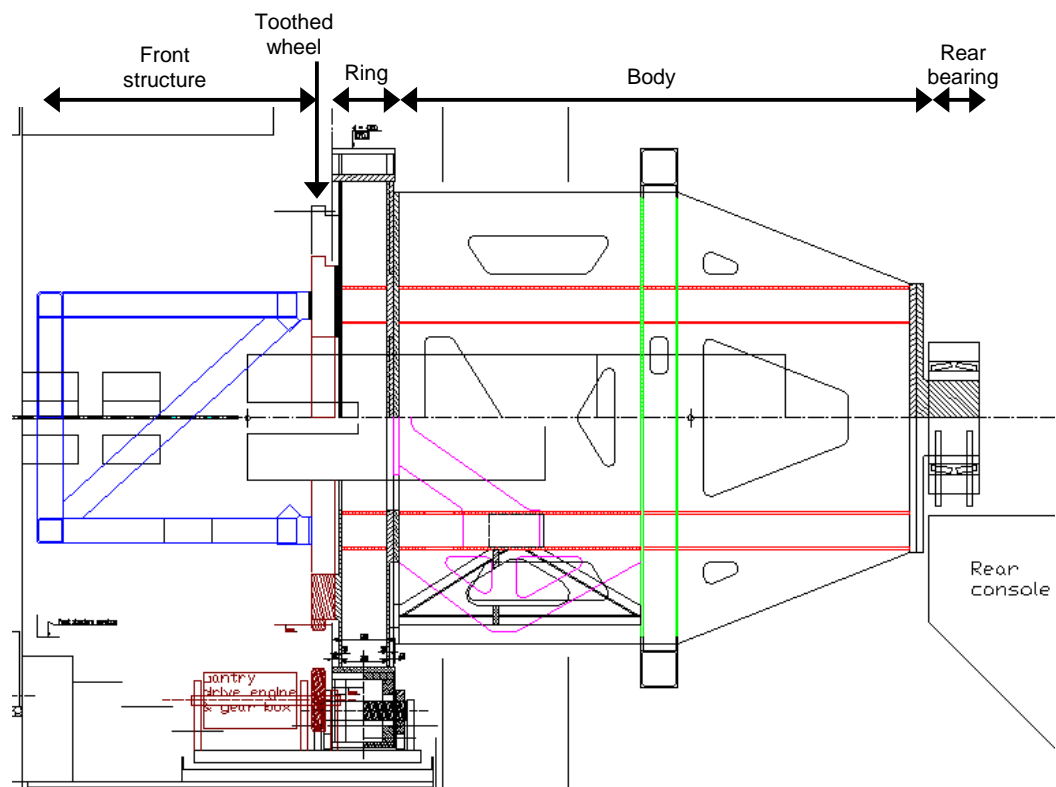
Side view of the cage showing its principal pieces that have to be bolted together (machined contact surfaces).
